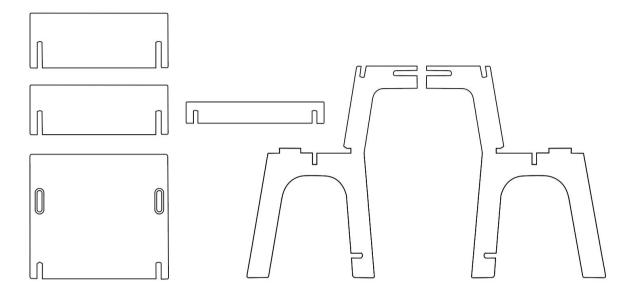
Armstrong, H. (2016) Current Plan for Object 4
